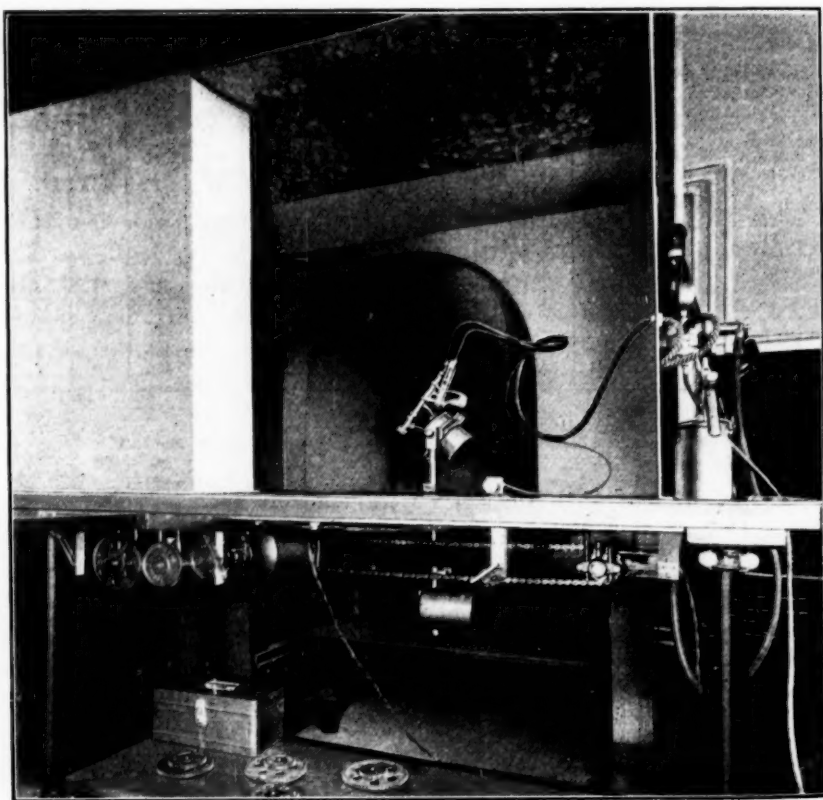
Spray Machine for Applying Coatings of Uniform and Controlled Thickness.
